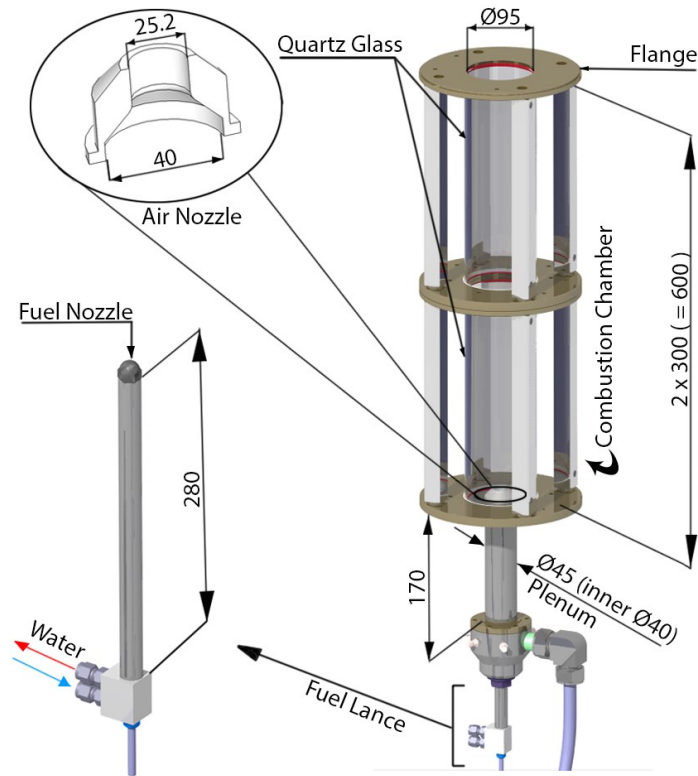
Detailed dimensions of the combustor along with the fuel lance and the air nozzle
